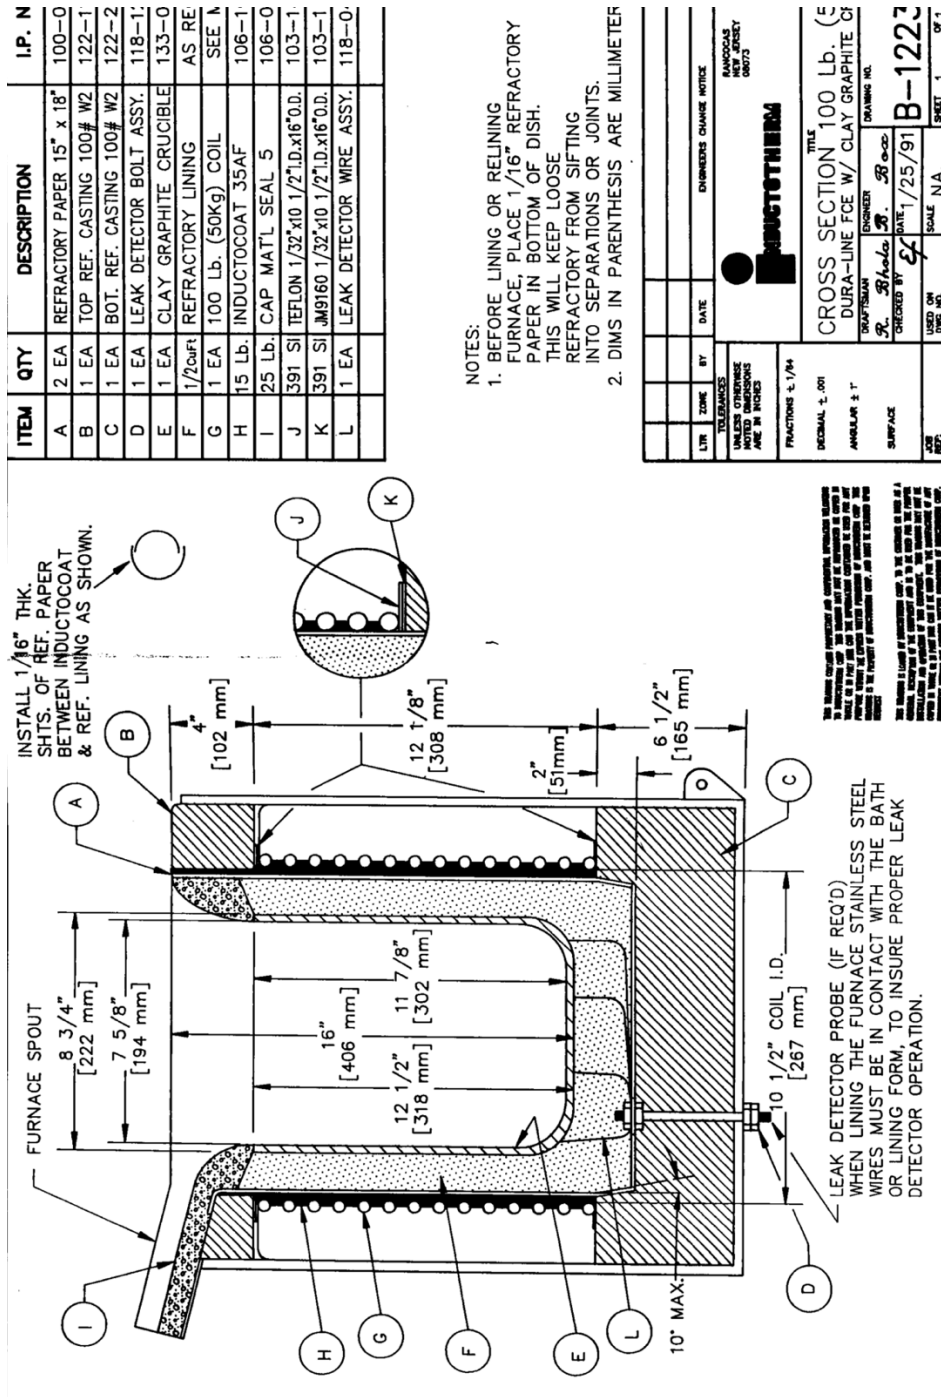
Technical drawing produced by the manufacturer of the Inductotherm furnace used for induction heating of firebrick samples.
